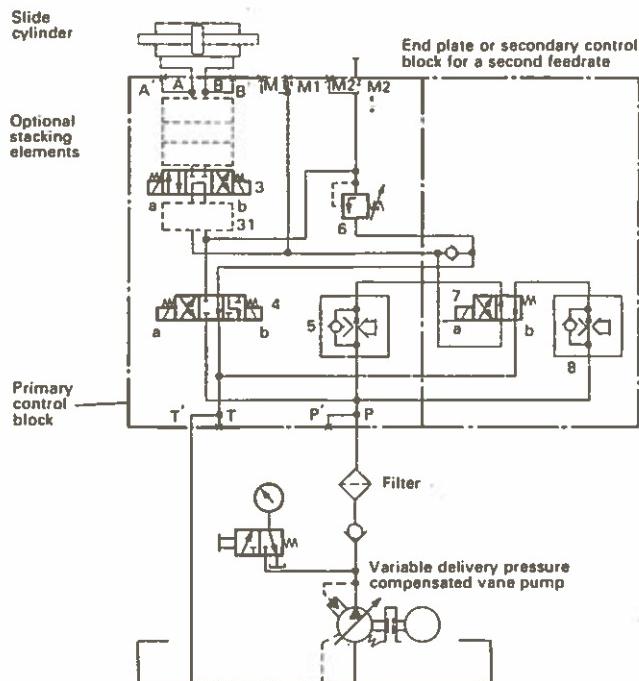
Simplified sketch of a machine tool hydraulic control system showing internally connected modules.
